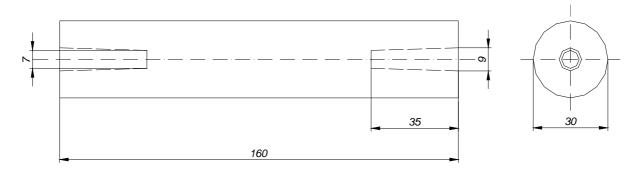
Turned test sample with 9/7 mm tapered hole diameter
